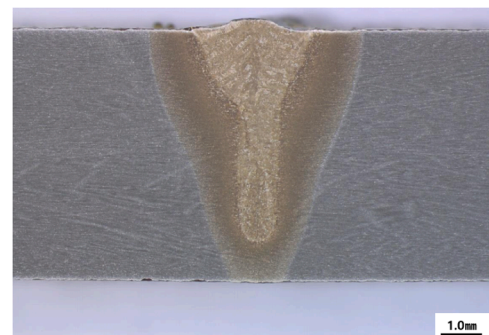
Cross-sectional view of the specimen at the welding speed of 1.0 m/min (Case 1).
